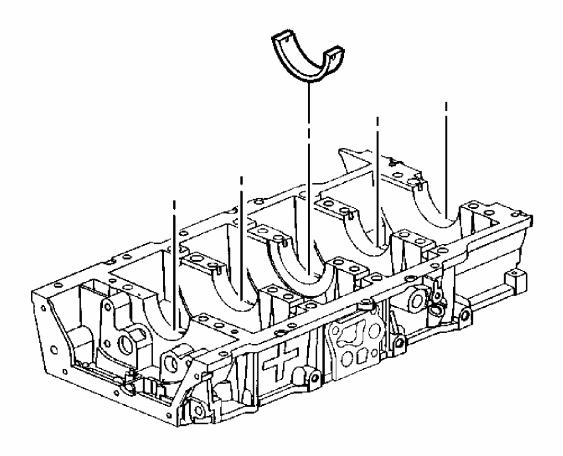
View Of Lower Main Bearing Halves Courtesy of GENERAL MOTORS CORP.
